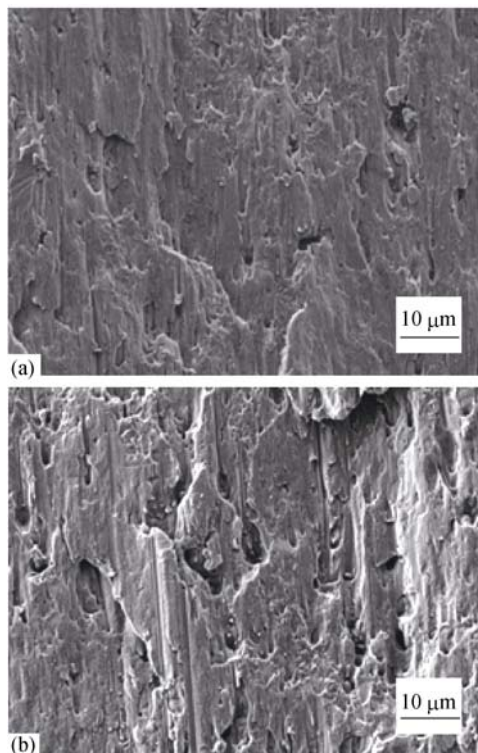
Tensile shear fracture surfaces of the 6061 aluminum alloy at different shear strain rates: (a) 0.01 s^{-1} ; (b) 5.56 s^{-1} .
